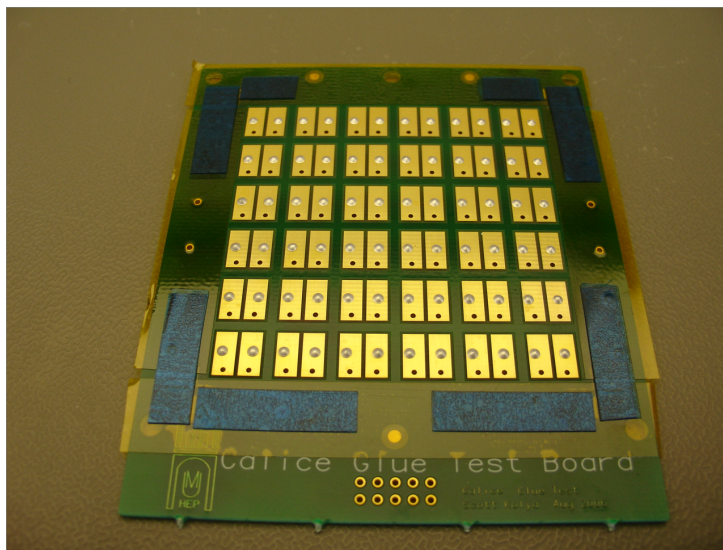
Snake test PCB with glue applied. Kapton spacers can be seen at the bottom of the board
